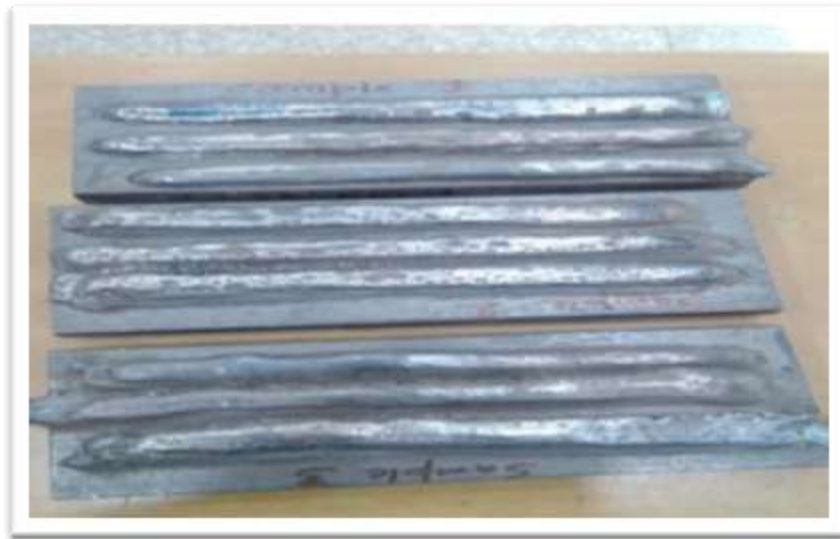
Weld pads prepared using different composition of slag
